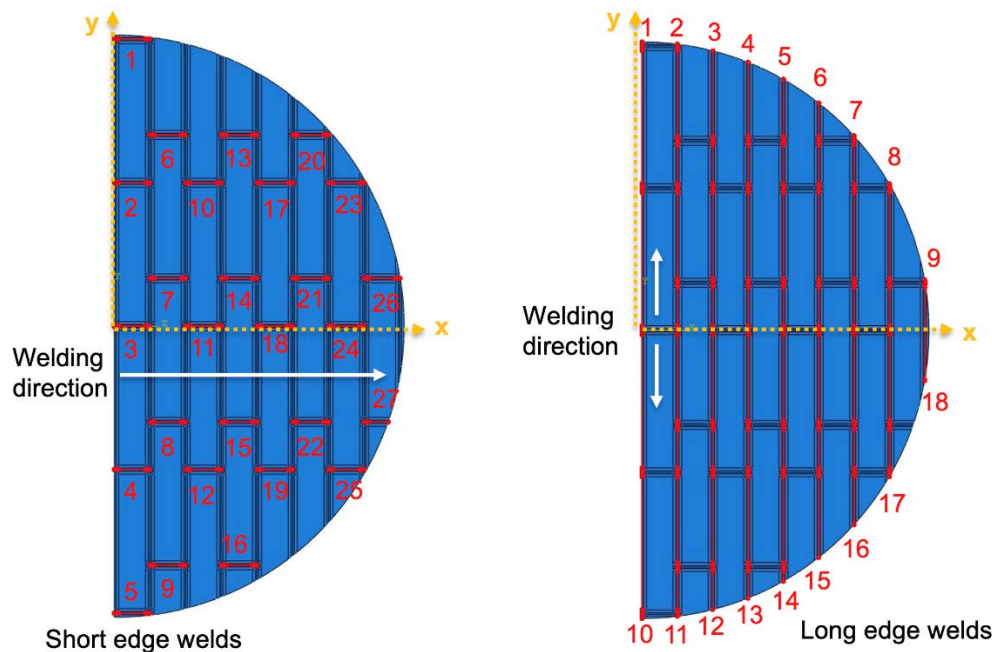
Welding simulation scheme along (a) short edges and (b) long edges
